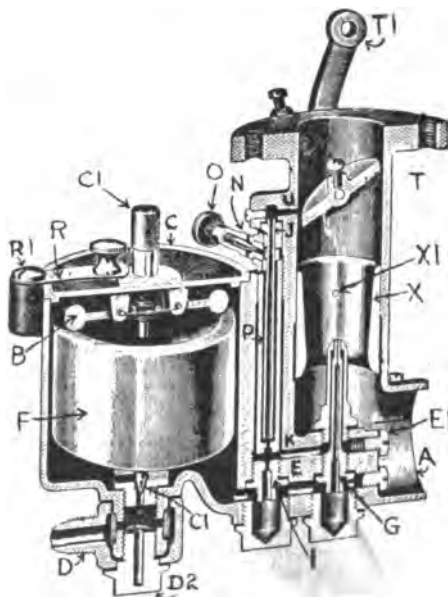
Zenith carburetor for 4 or 6 cylinder engine.
